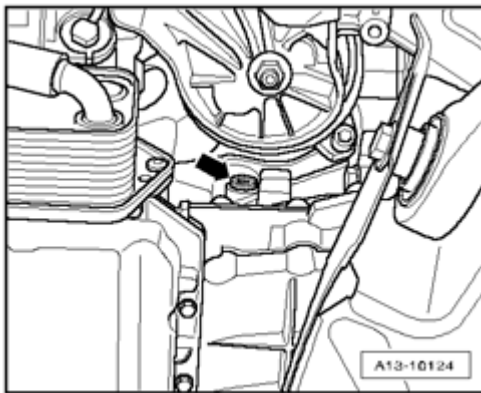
Removing/Installing Sealing Plug From Cylinder Block
